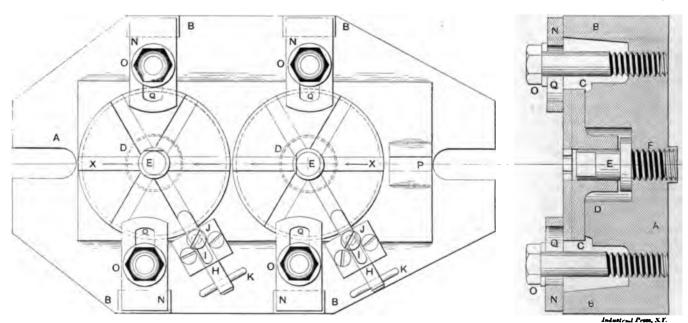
Milling Fixture for Indexing and Milling the Six Channels in the Work, Fig. 4.
